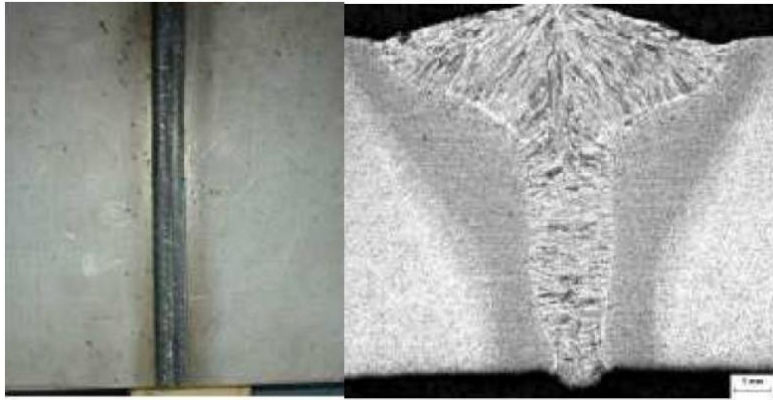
Comb-like un-strained reference sample for P91 TIG weld.
